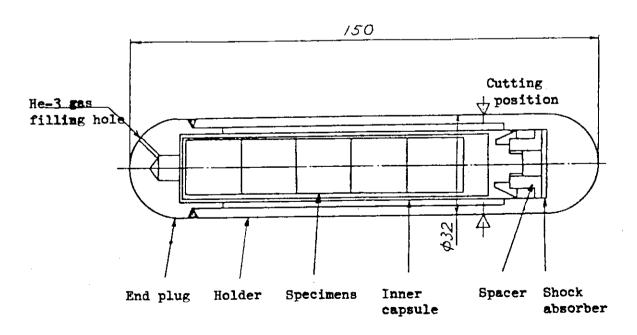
Longitudinal Cross Section of a Rabbit
